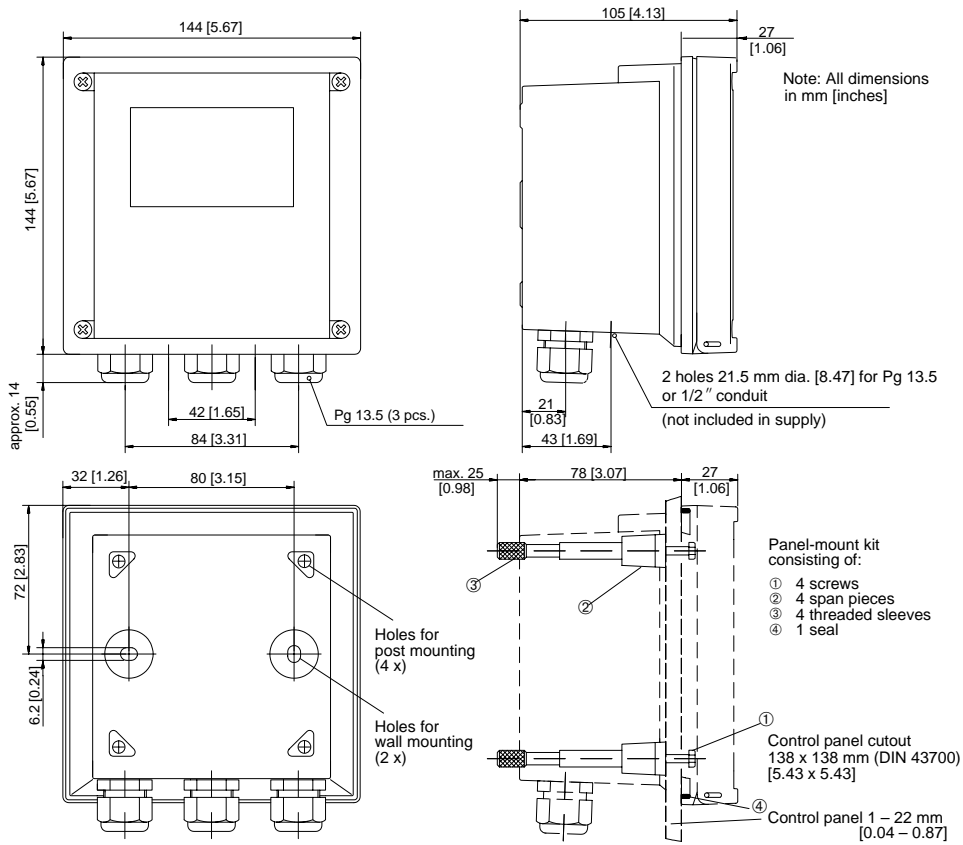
Dimension drawing for Transmitter, mounting diagram and P/N 51205990-001 panel-mount kit
